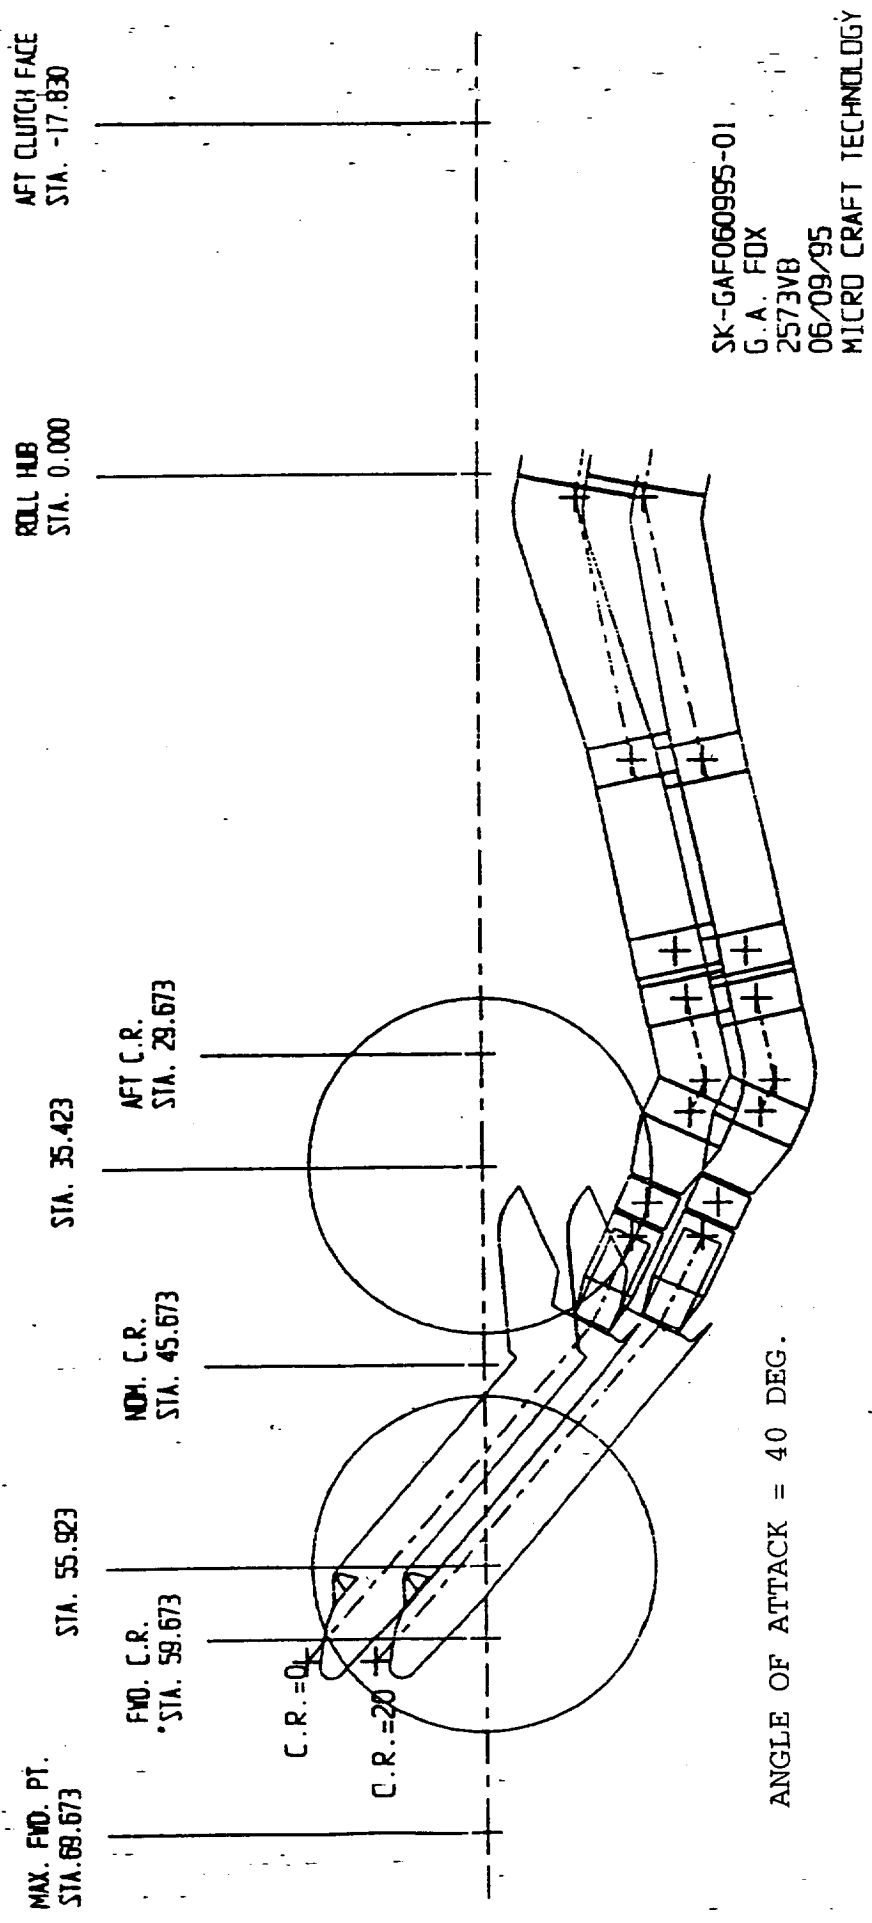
Installation Sketch of the Revised Model Position Within the AEDC Tunnel B Test Section
